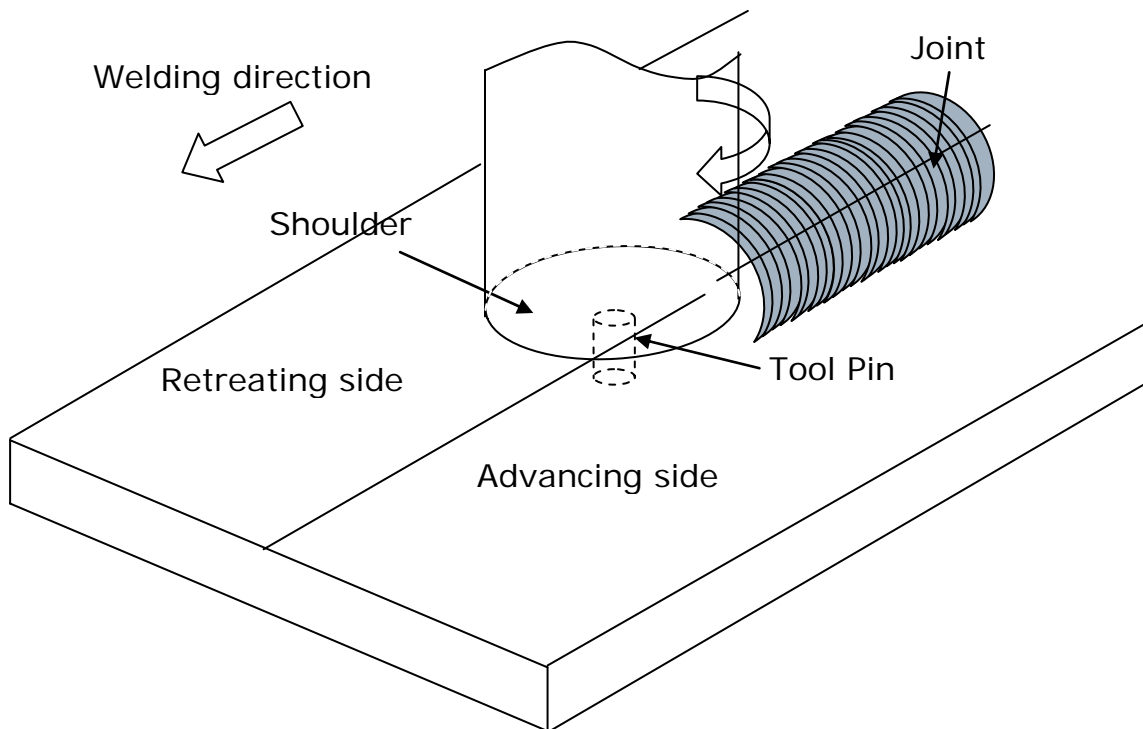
A schematic representation of the friction stir welding process.
